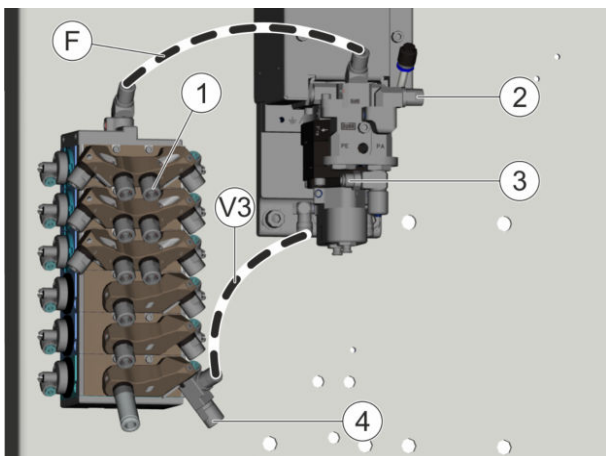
Material Connections 1K Variant with Gear Wheel Pump
